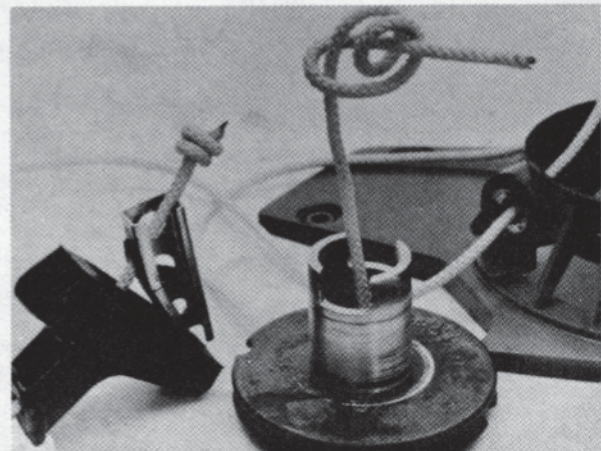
When installing new starter rope, knot ends as shown. Seal rope holes in pulley and coat knots with Duxseal (Homelite part No. 24382)
